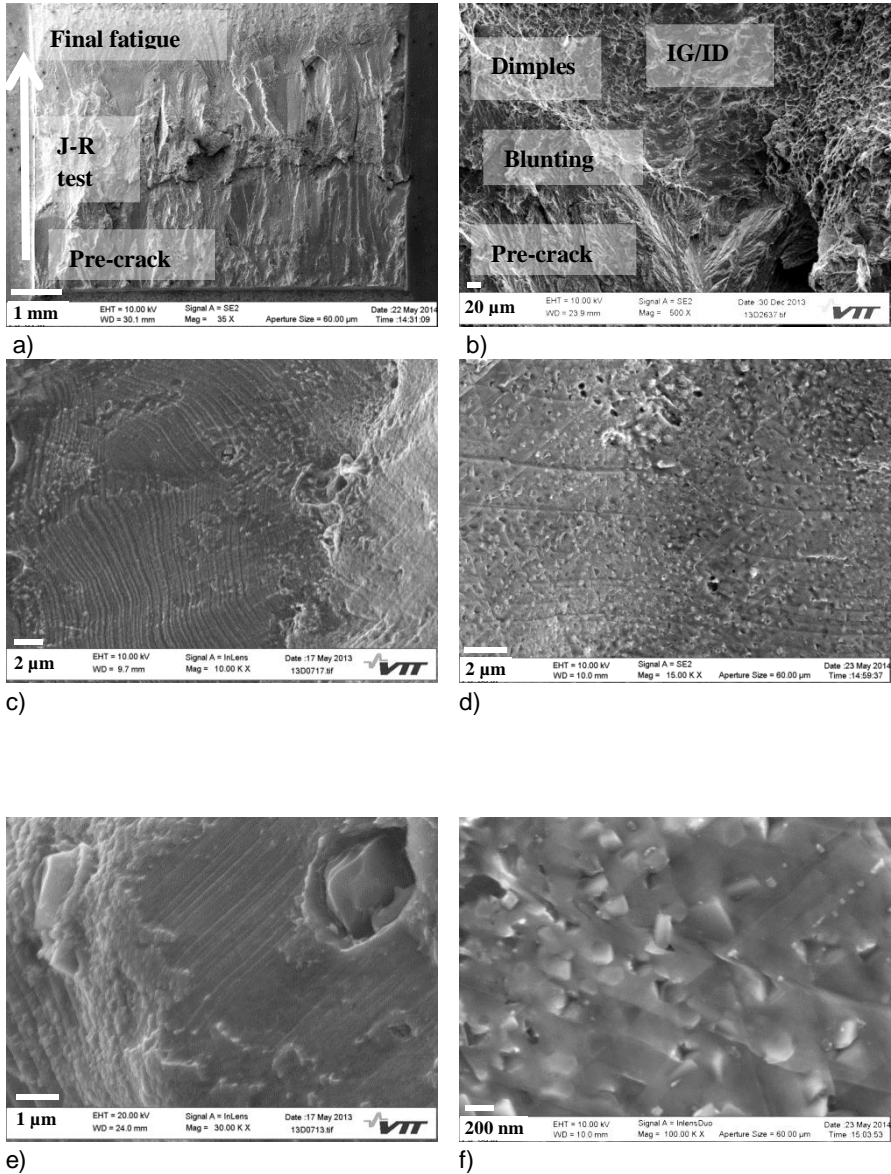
In a) a general view of the fracture surface of an Alloy 152 DMW spec-
